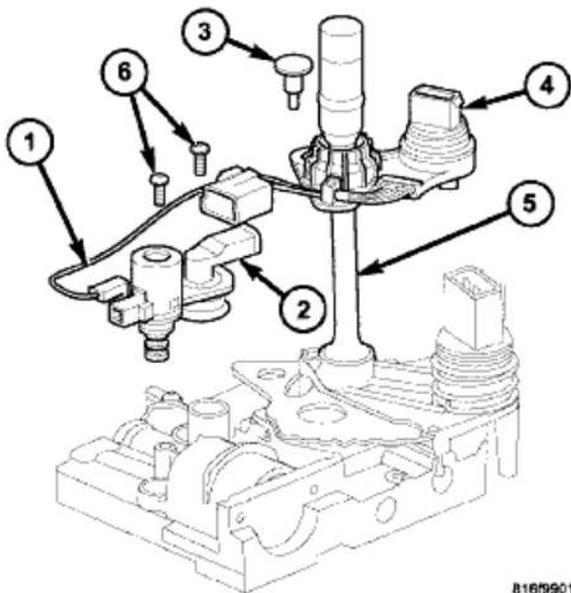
Removing/Installing Pressure Control Solenoid & Line Pressure Sensor
